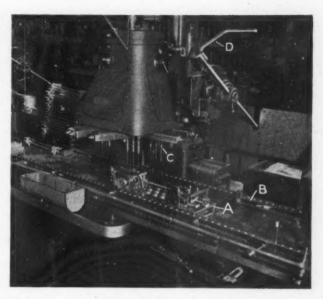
Set-up for Broaching Serrations in Two Pressed Steel Cam Components, on a Cincinnati Type 1/30 Hydraulic Machine
